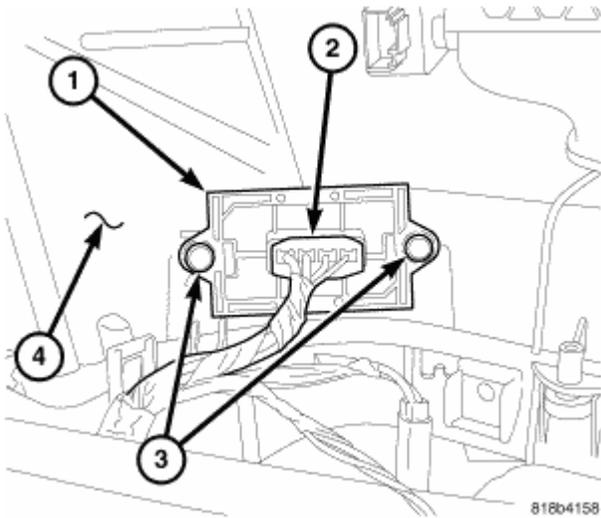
Blower Motor Resistor, Wire Harness Connector, Screws & HVAC Housing
